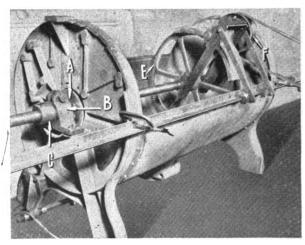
Equipment set up for machining face of counterbore for packing gland on a Hoffman 36-in. Vortex Washing Machine.
